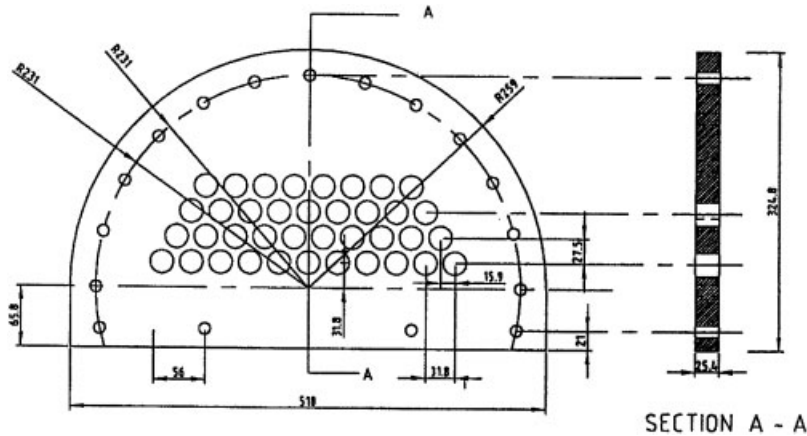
The tube sheet showing the arrangement of heat exchanger tubes.
